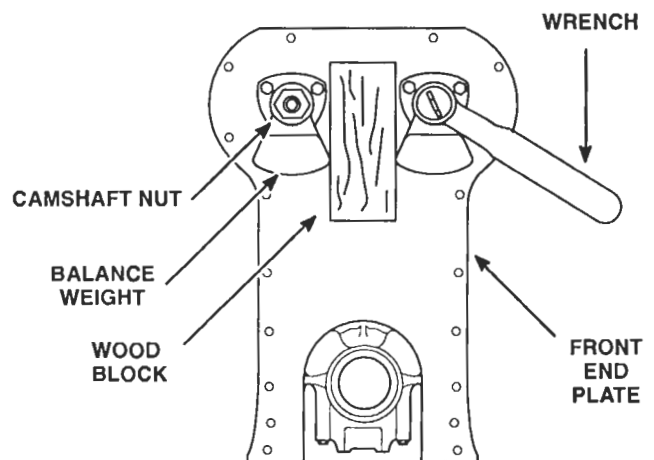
Loosening Nut on Camshaft or Balance Shaft
